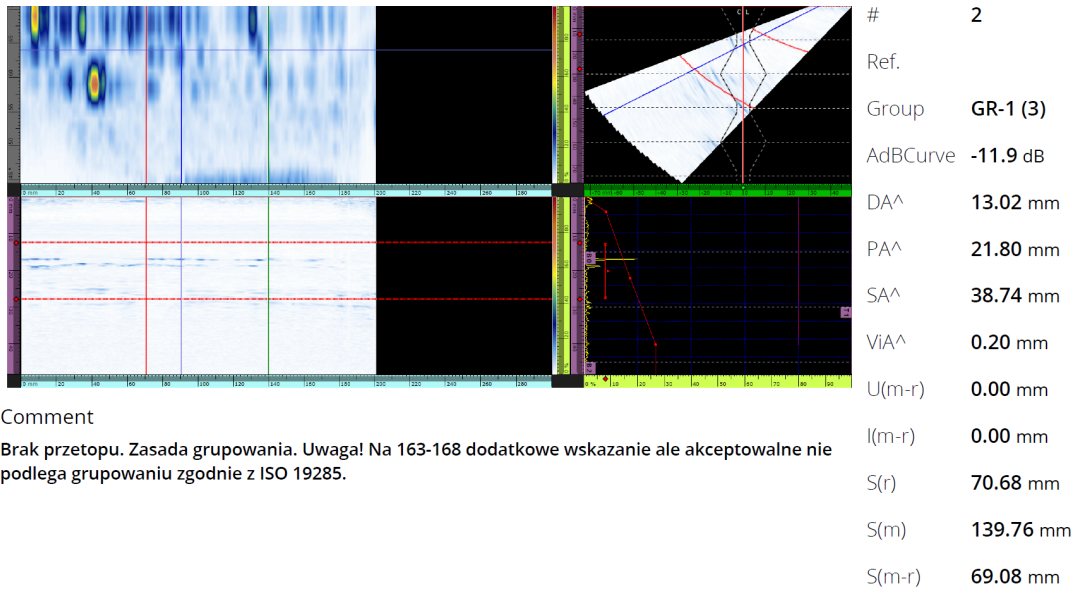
Exemplary scans of the welding imperfection (A-scan, S-Scan, B-Scan and C-scan)
